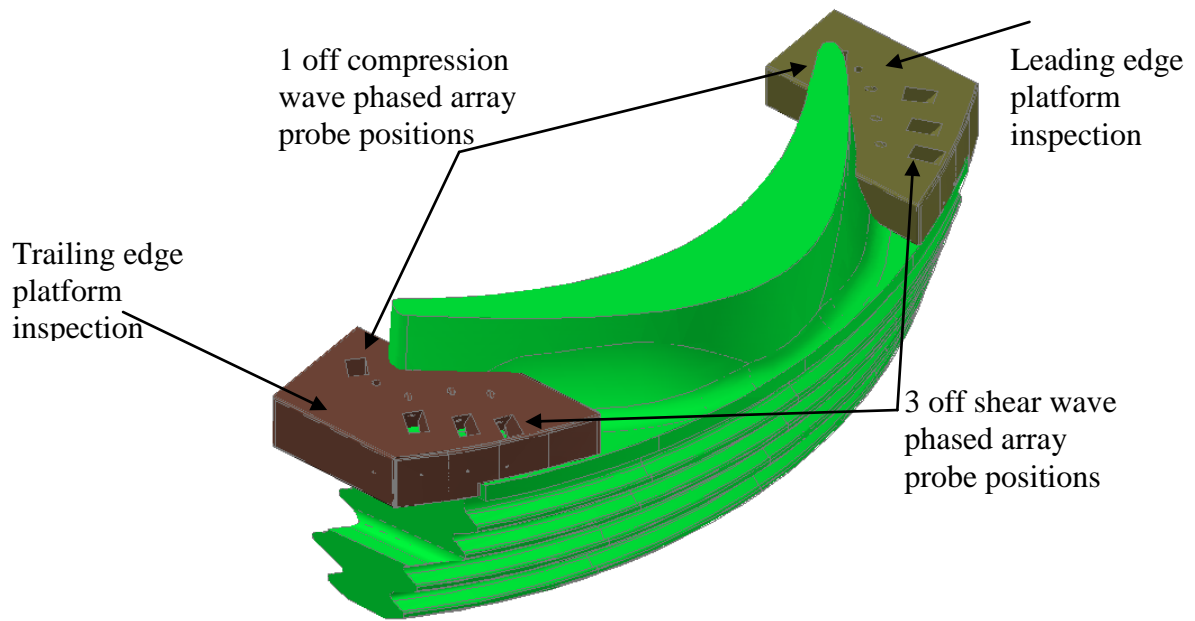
CAD model of rapid prototyped platform inspection jigs
